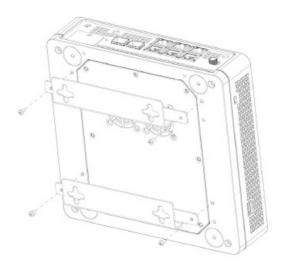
VEP1405 series wall mount installation – cross-shaped cutout
